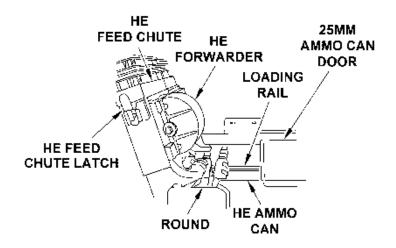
HE Feed Chute Latches at HE Forwarder Location Inspections.
